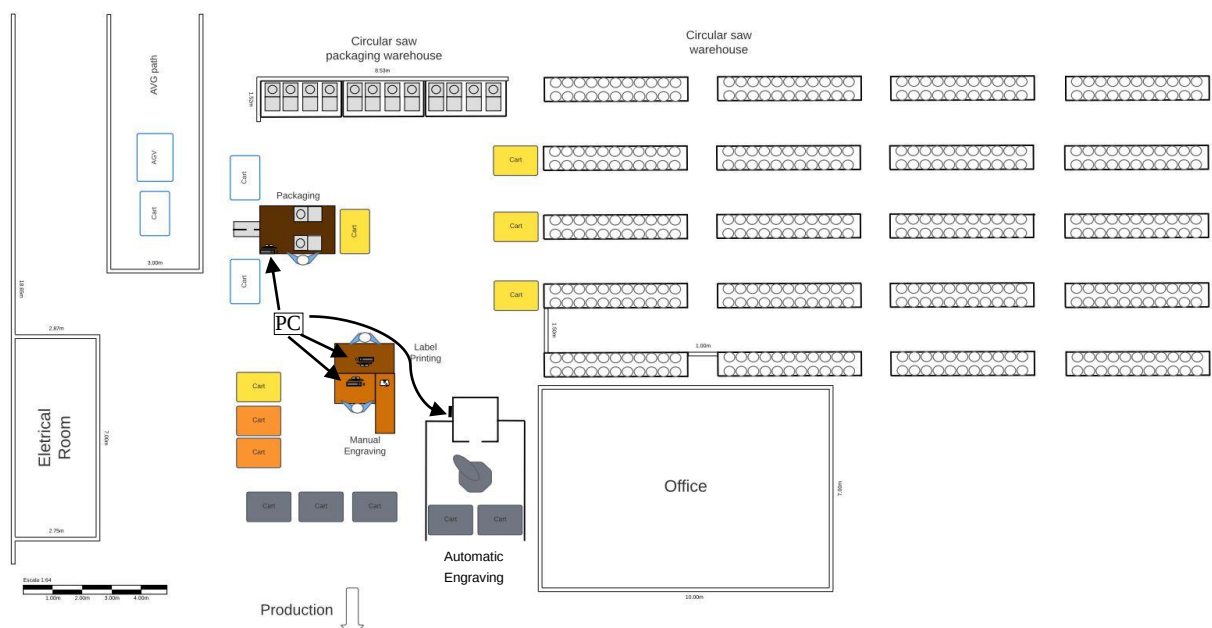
Layout of the engraving and packaging stage of the circular saw production
